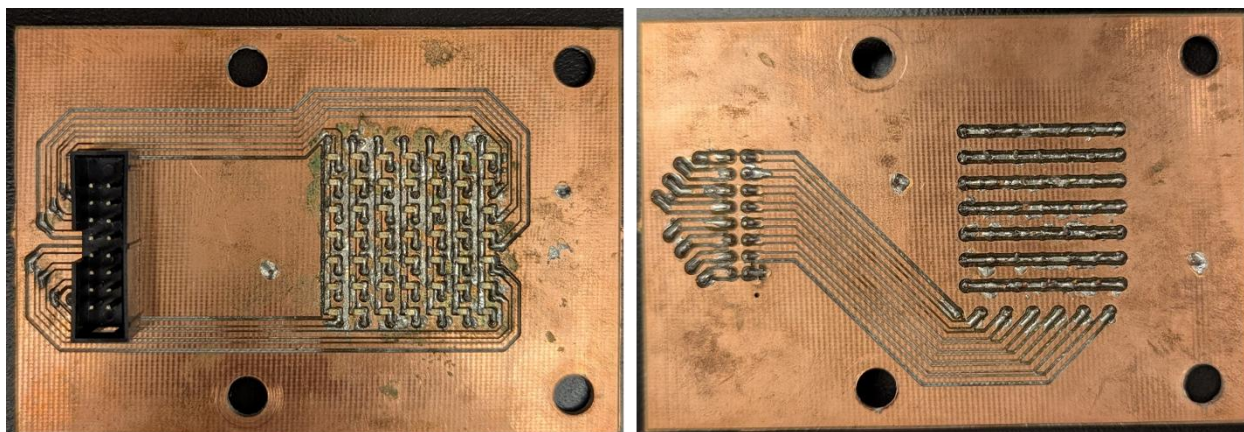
7×7 PCB (LEFT) Top (RIGHT) Bottom
